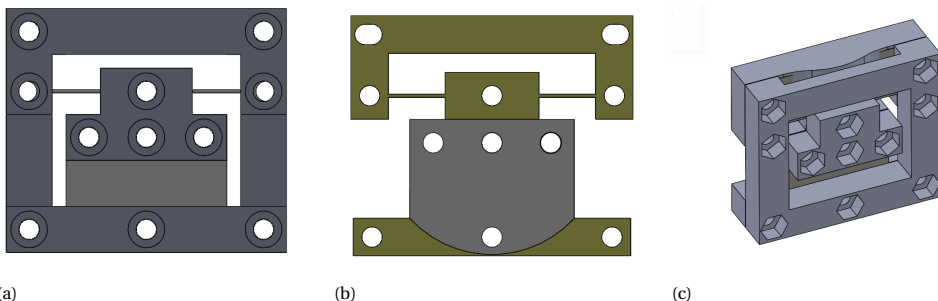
a) Prototype using packaged-induced preloading. b) Flexures-transducer combination. c) The thickening in the geometry of the package on the top side makes for a shortening of the flexures, resulting in a preload.
